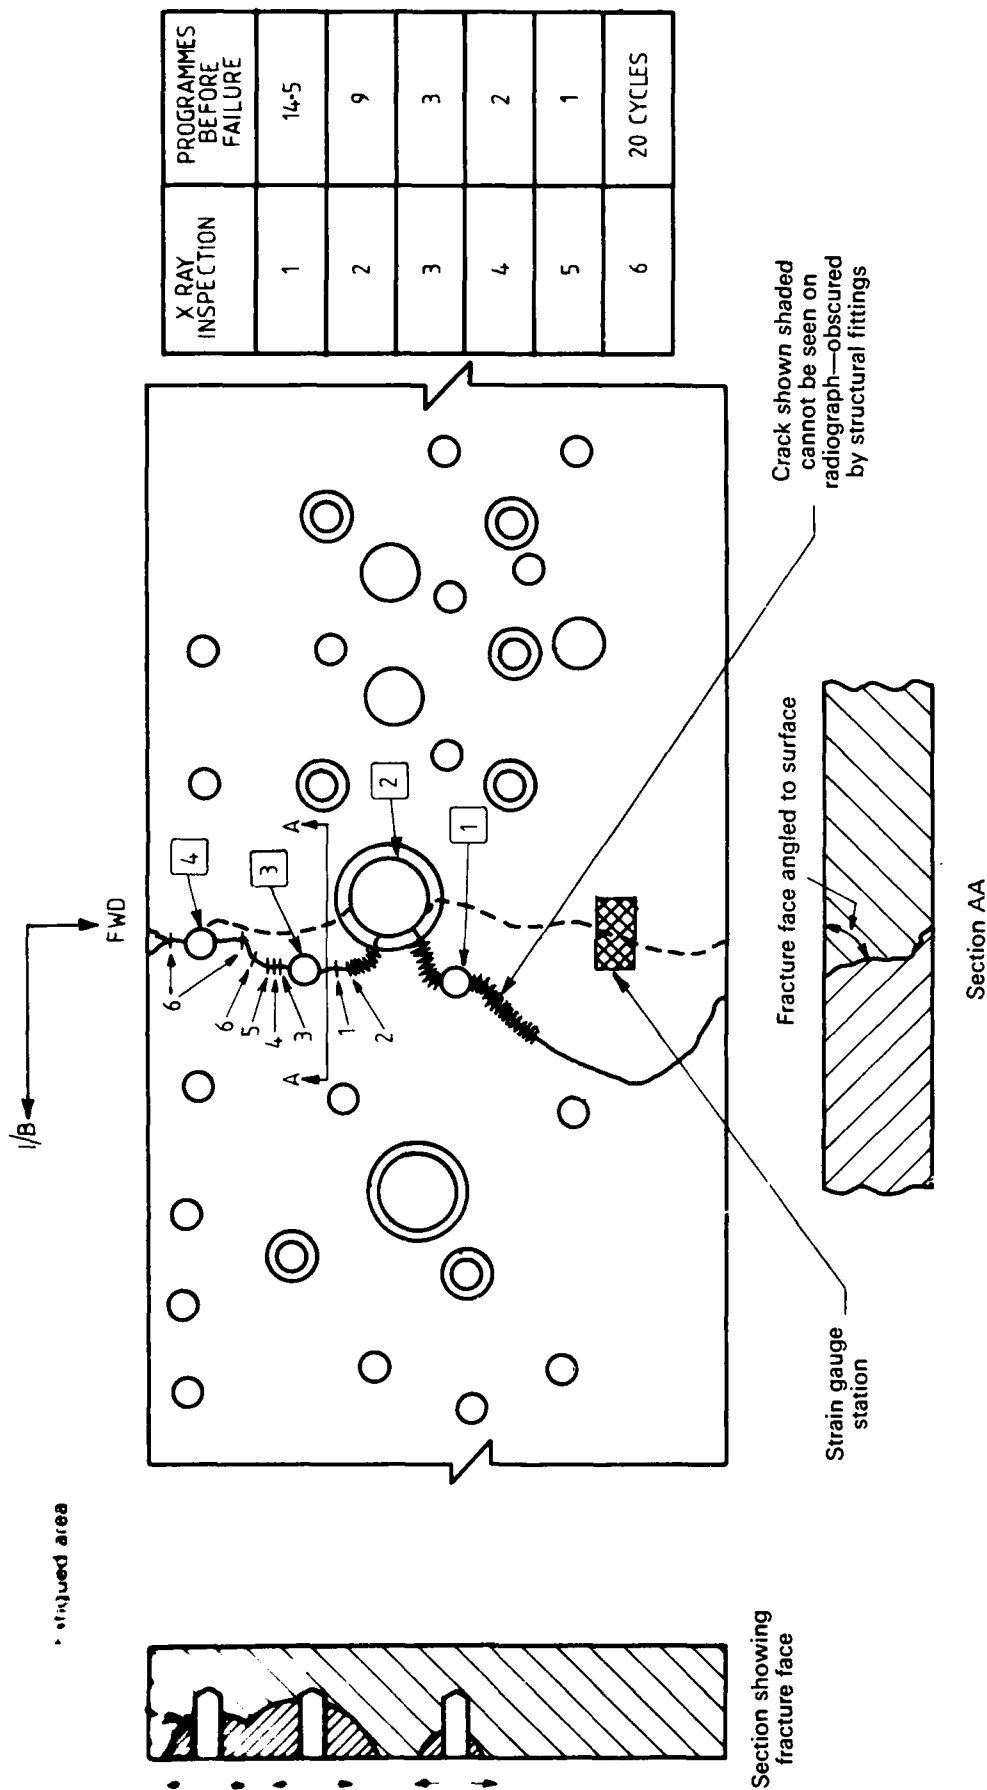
LOWER SPAR BOOM—RIB 2 FAILURE—SPECIMEN No. 6
